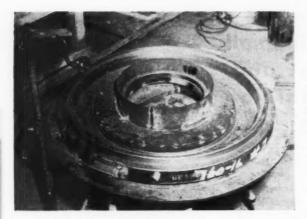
This photo shows a rotating jig which has been used to speed the duplication of molds and dies by metallizing.
